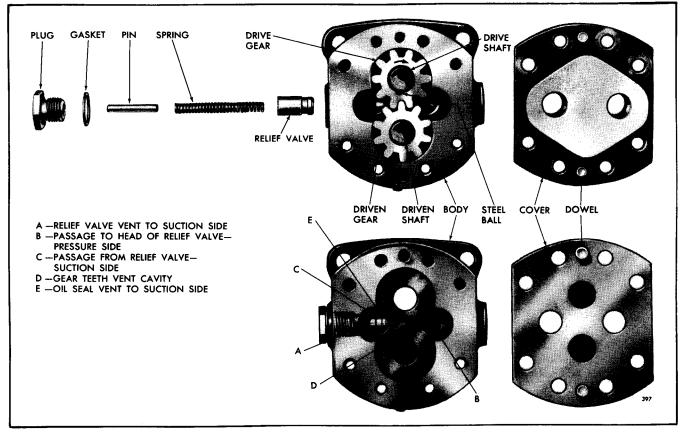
Fuel Pump Valving and Rotation (Right Hand Pump Shown)
